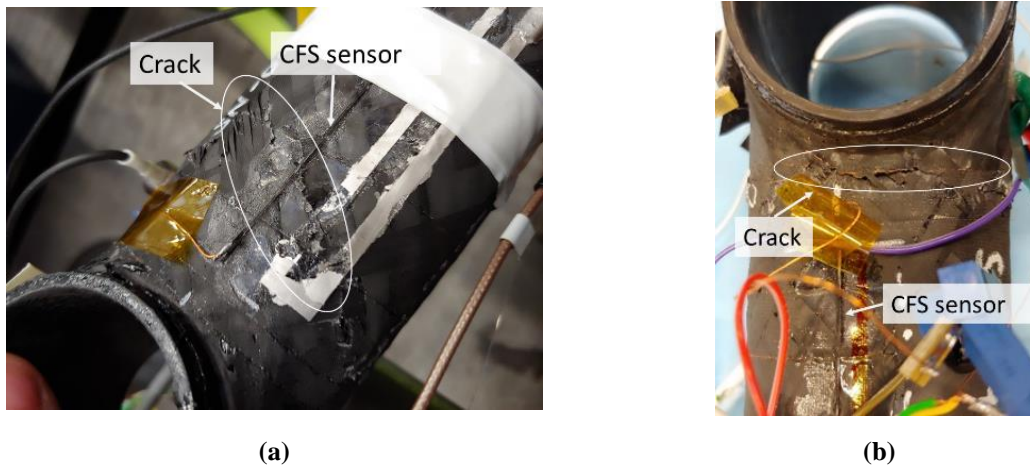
Specimen 34 with the crack in the area of CF sensor (a), Specimen 13 with the crack next to the CF sensor (b)
